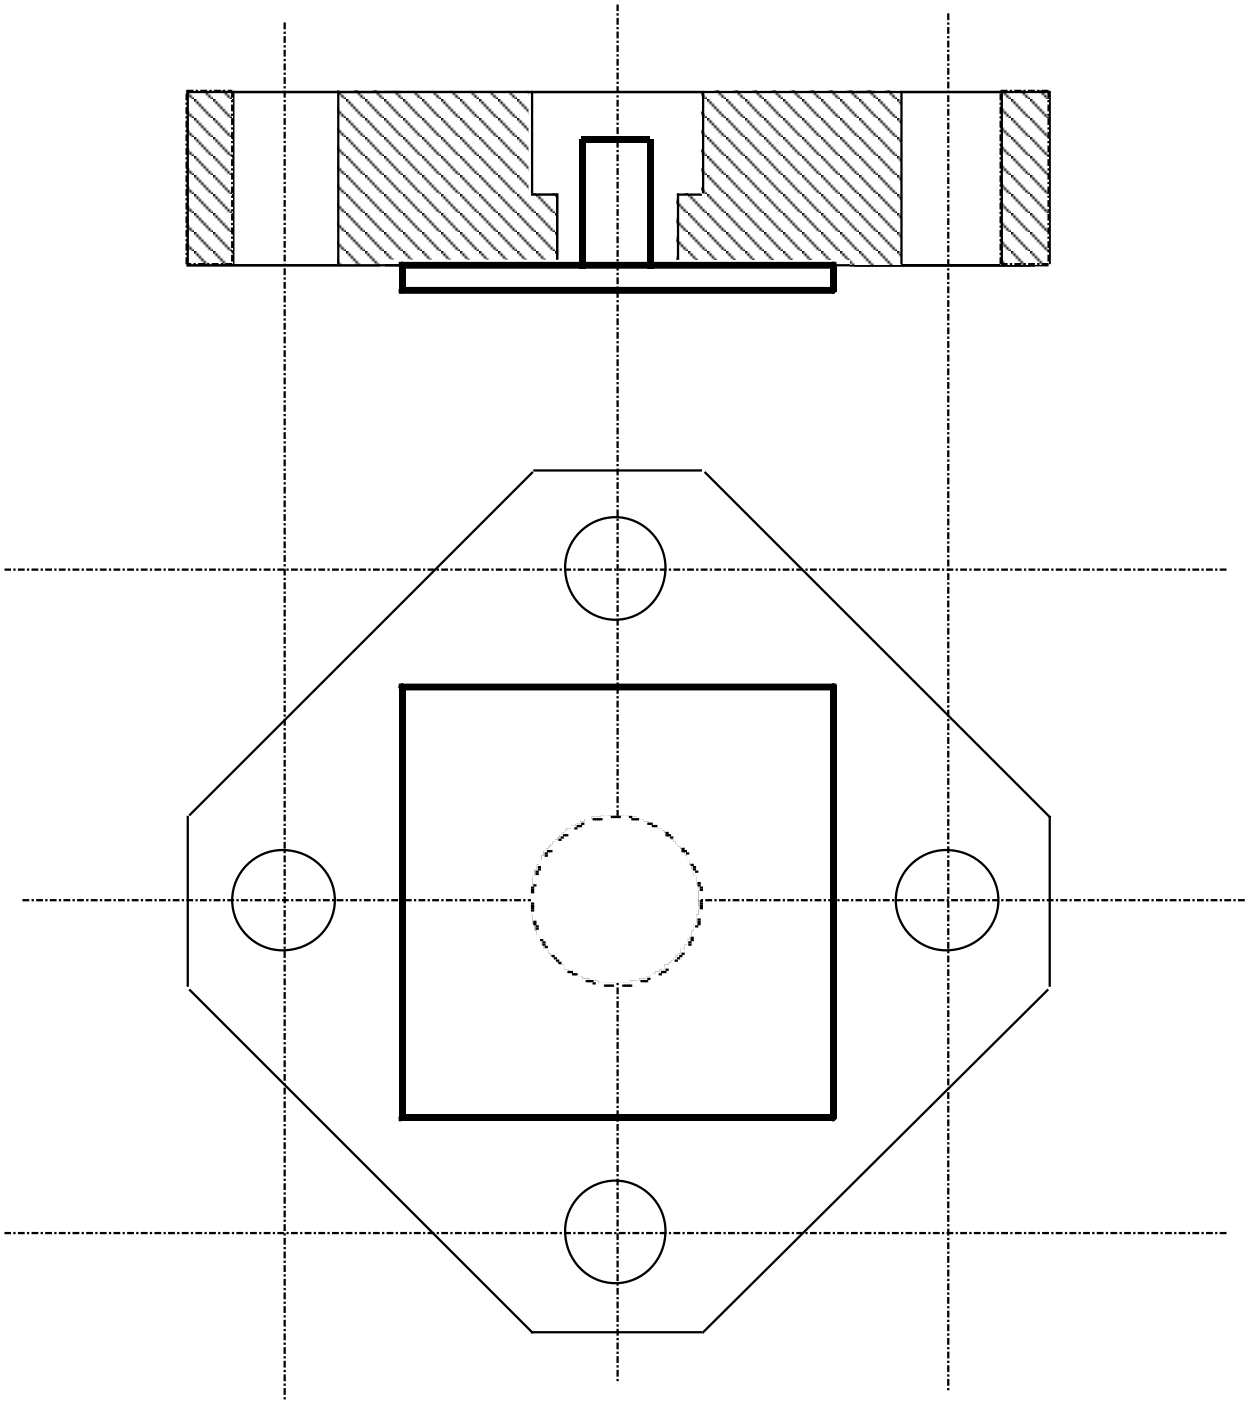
Schematic diagram of upper side of fixing jig for plate side of specimen.
